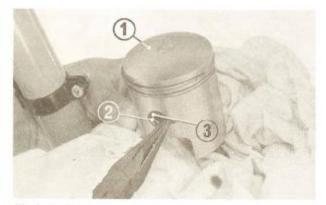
(1) Piston (2) Piston pin dlip (3) Piston pin
